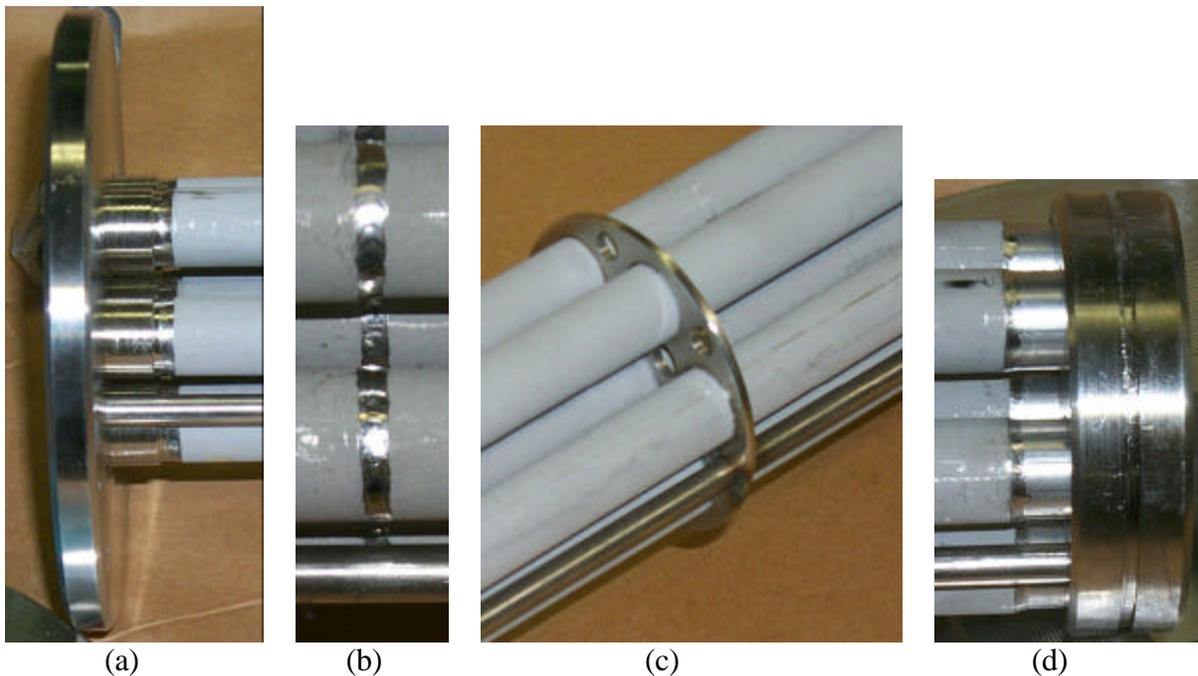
(a) Large-tube sheet, (b) tube-to-tube weldment, (c) tube supports, (d) small-tube sheet.
